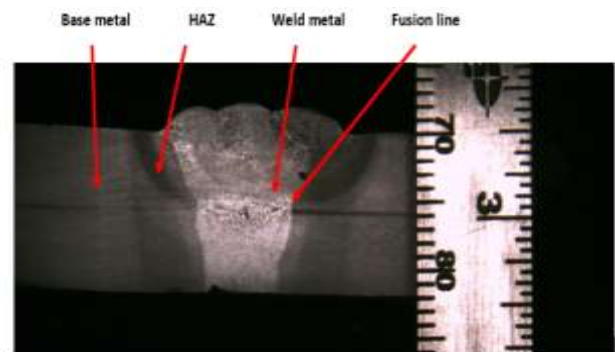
Macroprofile of carbon steel welded at heat input of 2030 J/mm.
